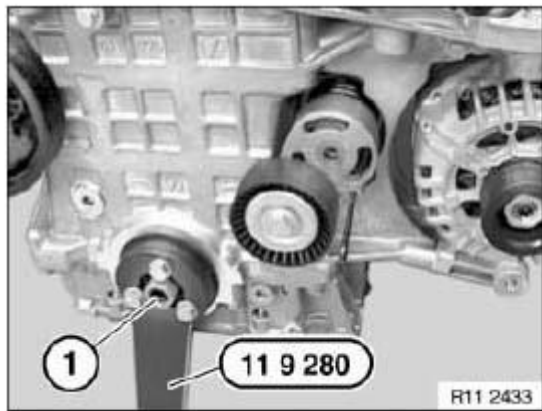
Identifying Special Tool (11 9 280) And Central Bolt
